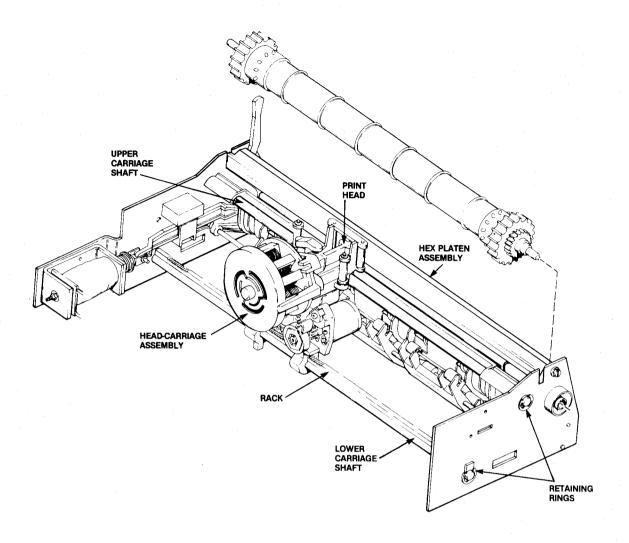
HEAD-CARRIAGE ASSEMBLY REPLACEMENT
